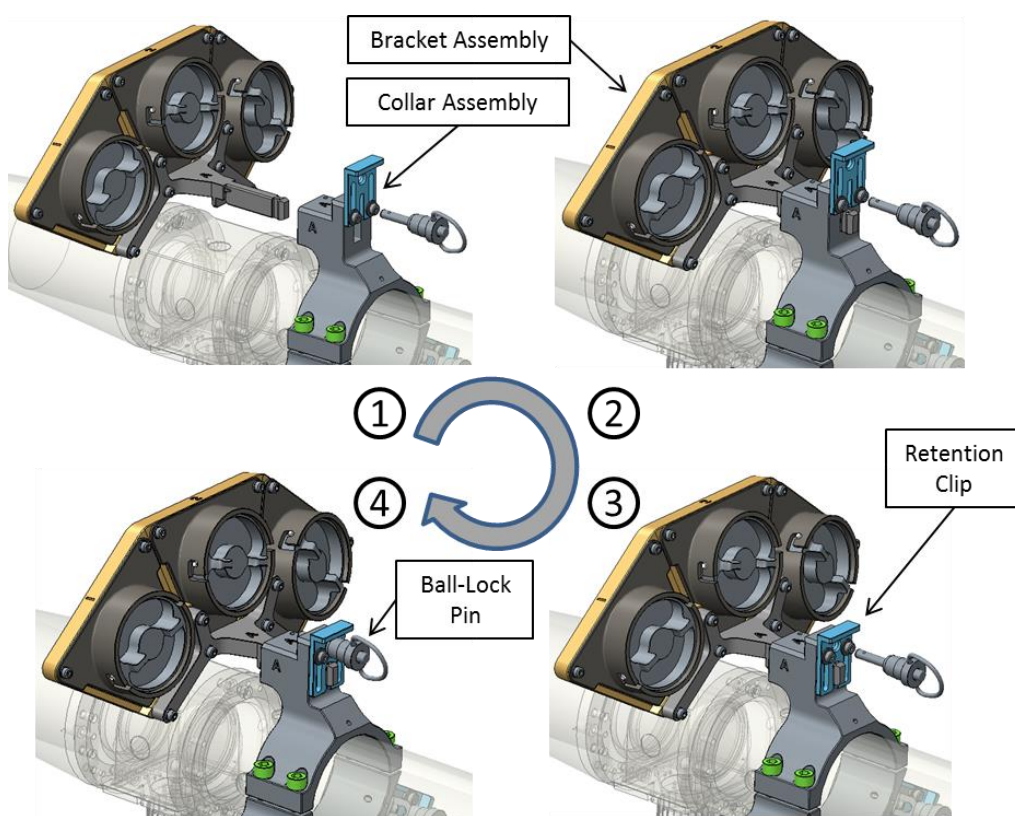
Installation of a VADER bracket assembly is achieved by first inserting the bracket flange-end stem into the collar receiving bore, then engaging both the retention clip and ball-lock pin.
